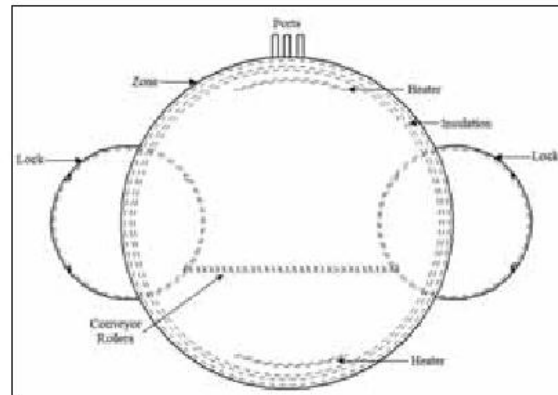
Front View of Single Cylindrical Zone with Two Locks on each side
